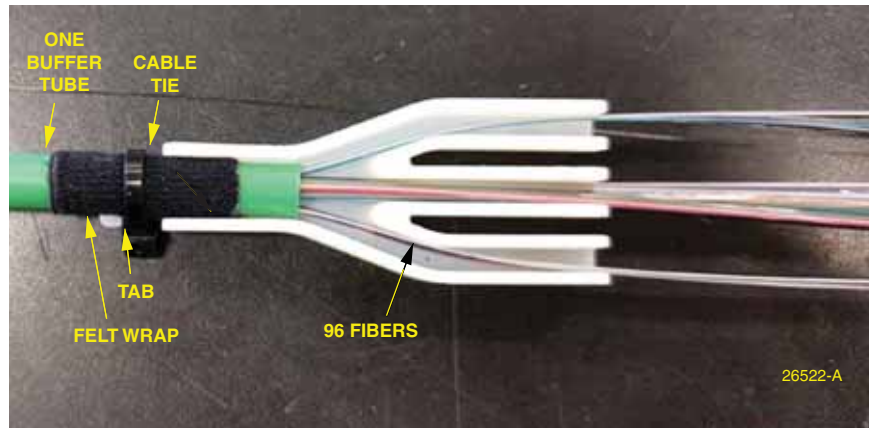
Breakout Insert Installed on Loose Buffer Tube
